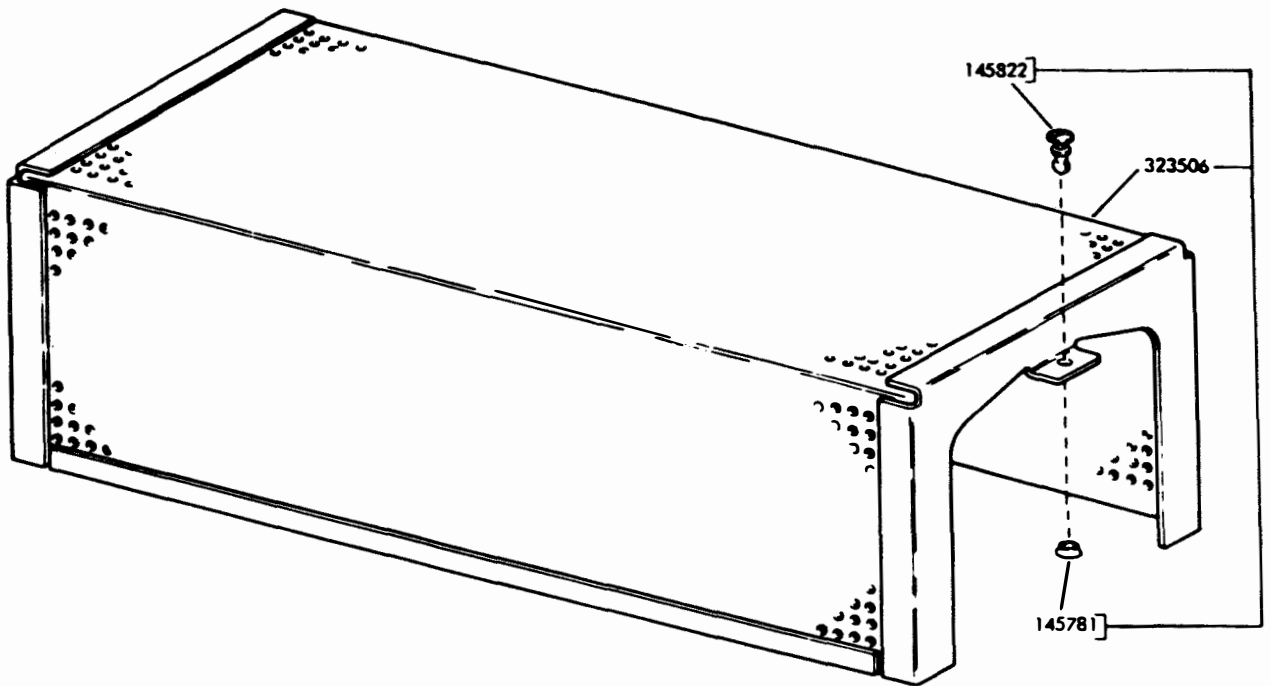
Electrical Service Assembly Covers (Sheet 2 of 2)
